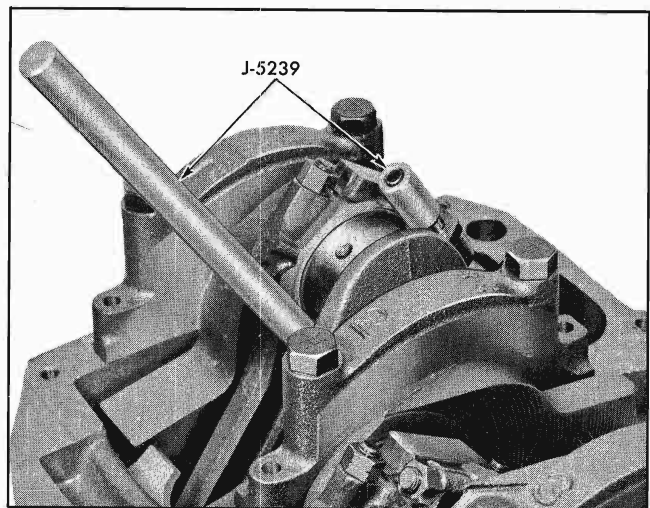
Removing Connecting Rod and Piston Assembly with J-5239
